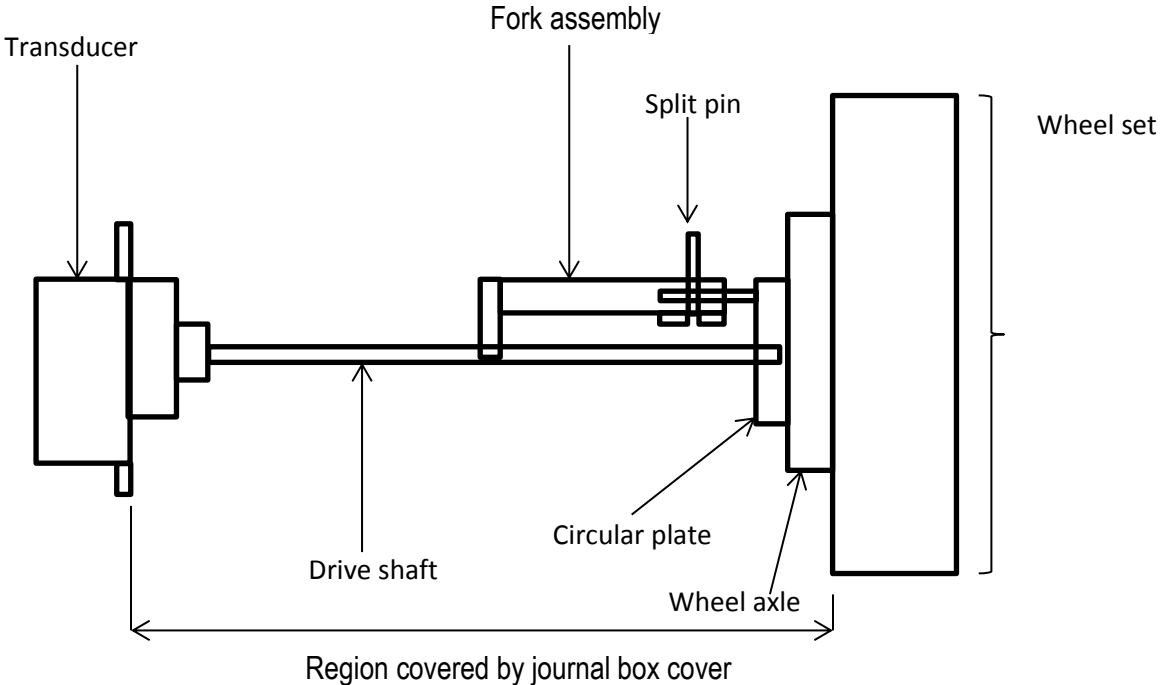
Connection of DFH₂ transducer to wheel axle after removal of journal box cover.
